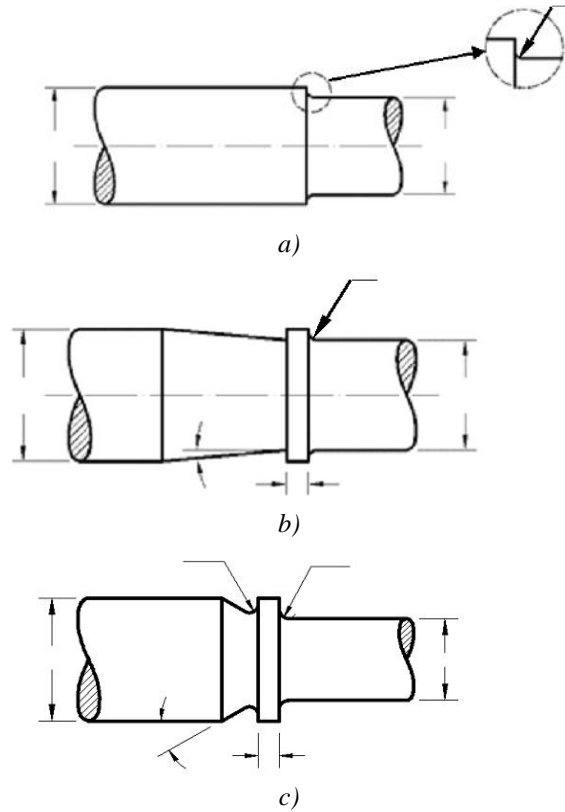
Geometric parameters of FEA models: a) Stepped shaft with shoulder fillet; b) Stepped shaft without relief groove; c) Stepped shaft with relief groove.
